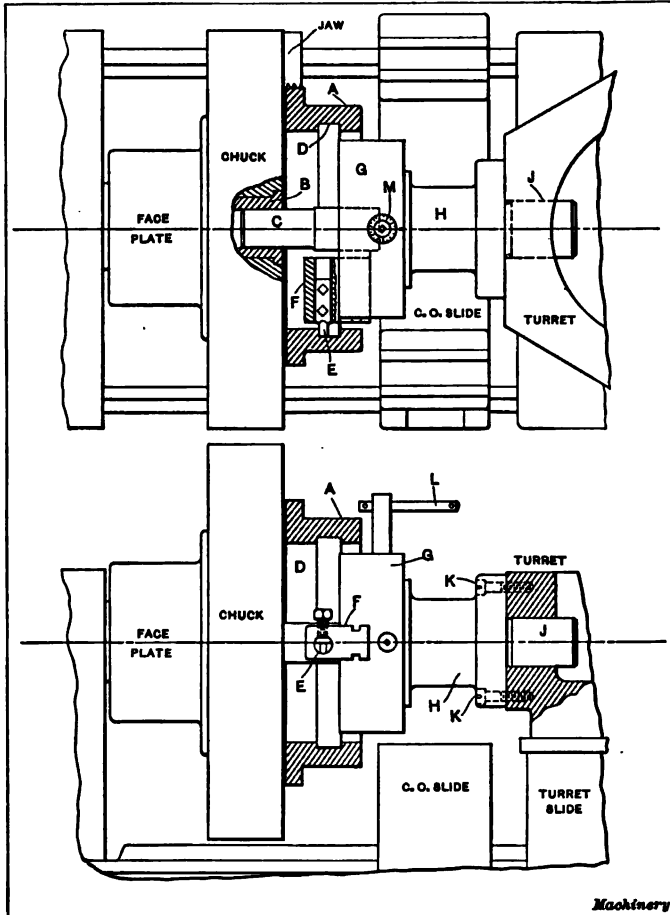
A Recessing Tool for a Large Collar, used in a Turret Lathe
